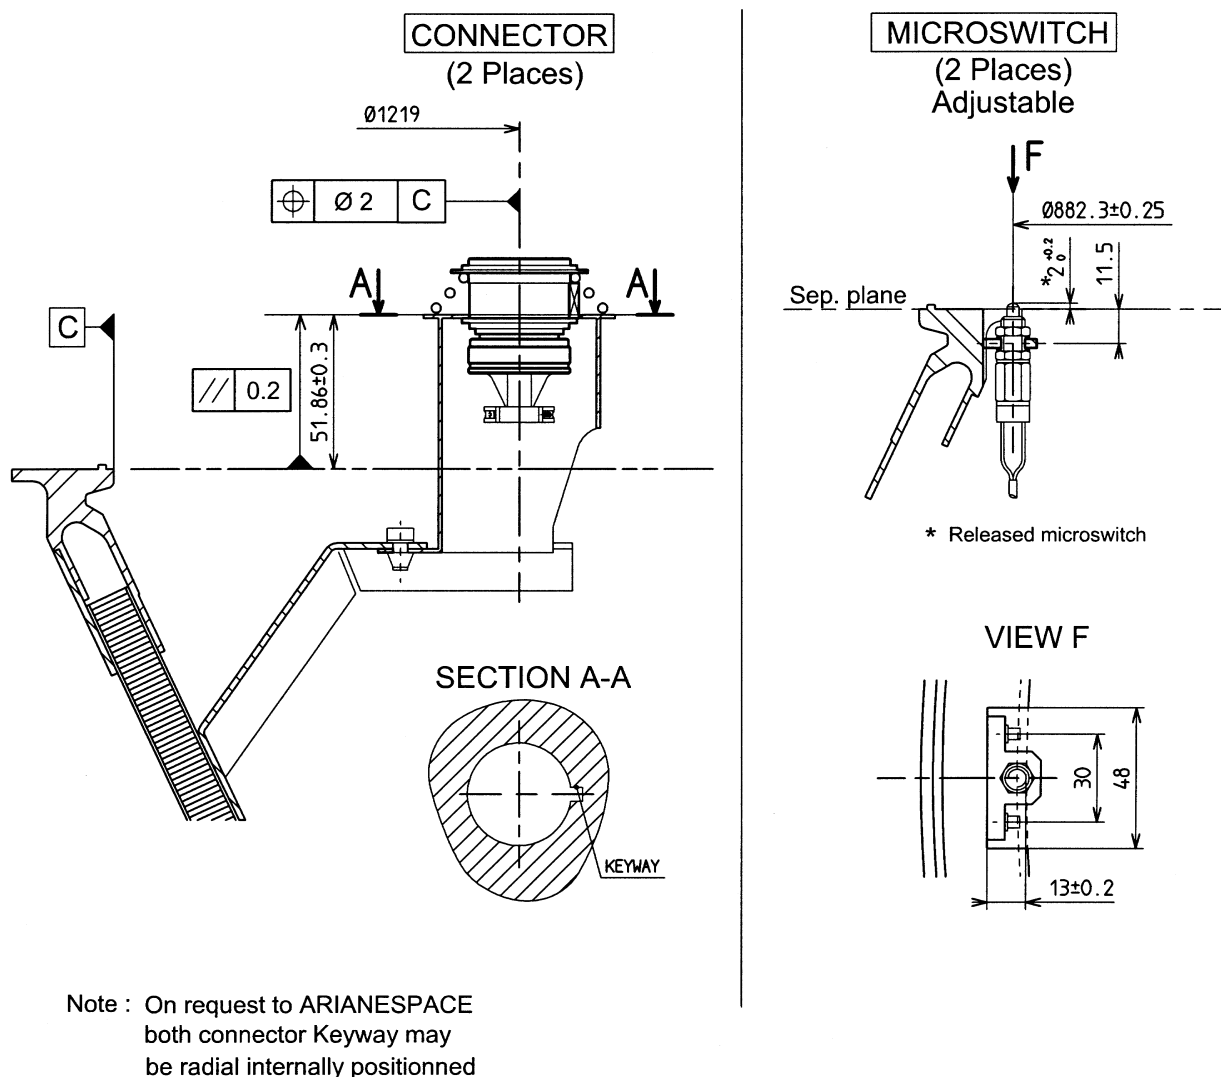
Adaptor 937B mechanical interfaces (details)
